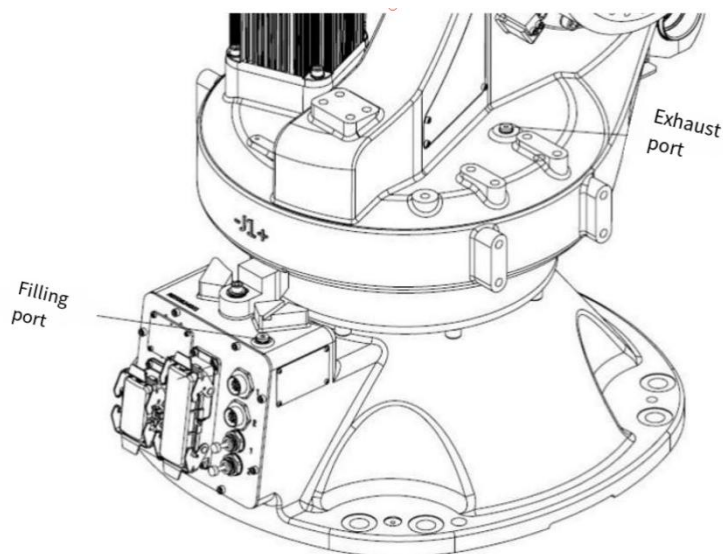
Replacement of the J1 shaft reducer grease for the models RX3-A650-2260, RX3-A680-2260, RX3-A635-2700, and RX3-A620-3100
